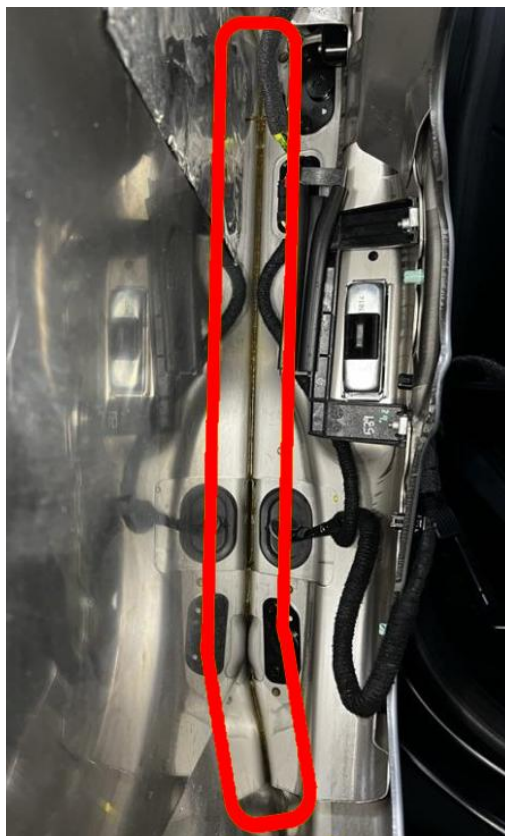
Reinforcement bracket at front end of front door; rear door similar
